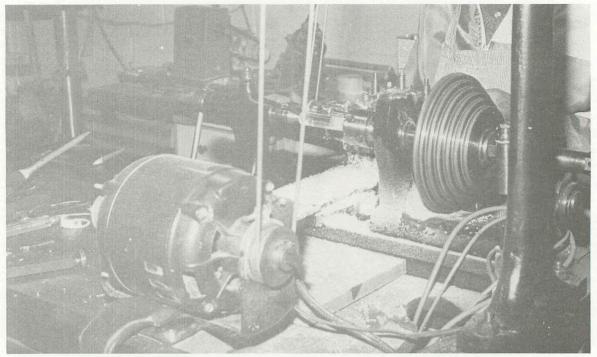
Half-horsepower motor clamped to lathe table with polyurethane belting running up to overhead train.
